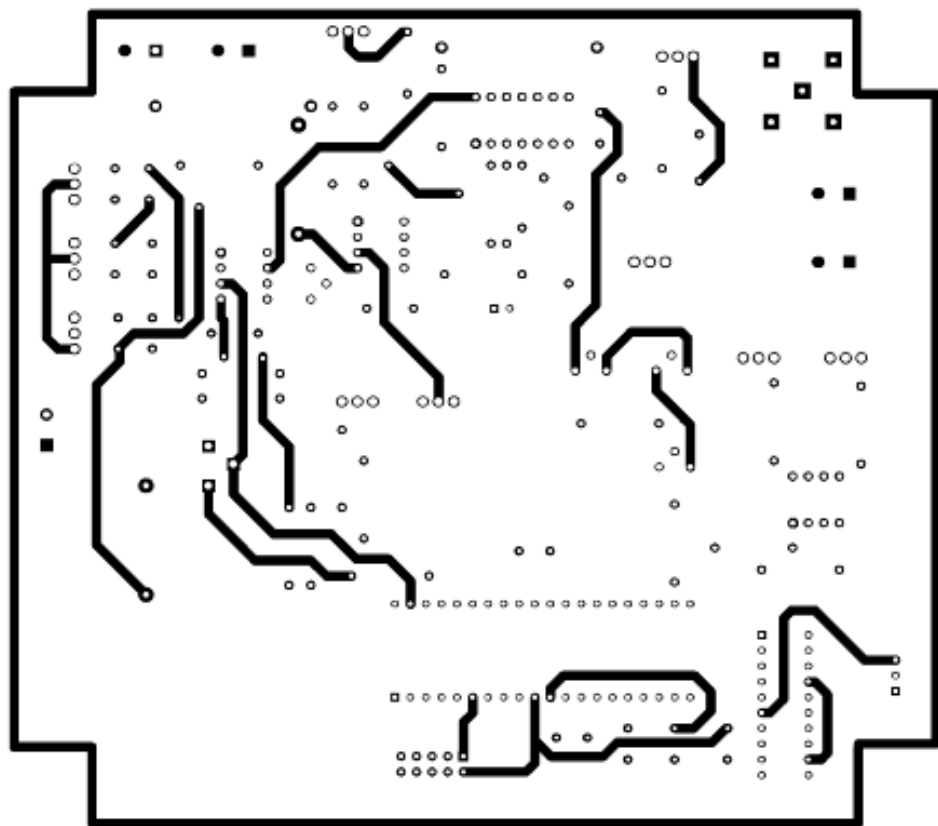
The bottom side of the VCCS PCB, showing the tracks and through-holes.
